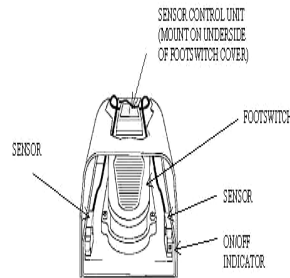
Sensors are fastened to the SIDE of the laser foot switch HOUSING
